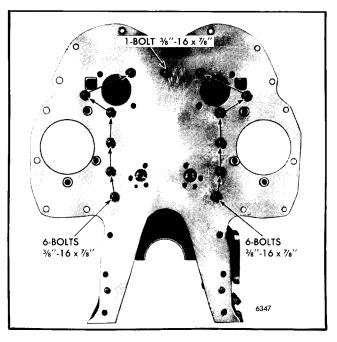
Cylinder Block Rear End Plate Mounting (4-53 Engine)
